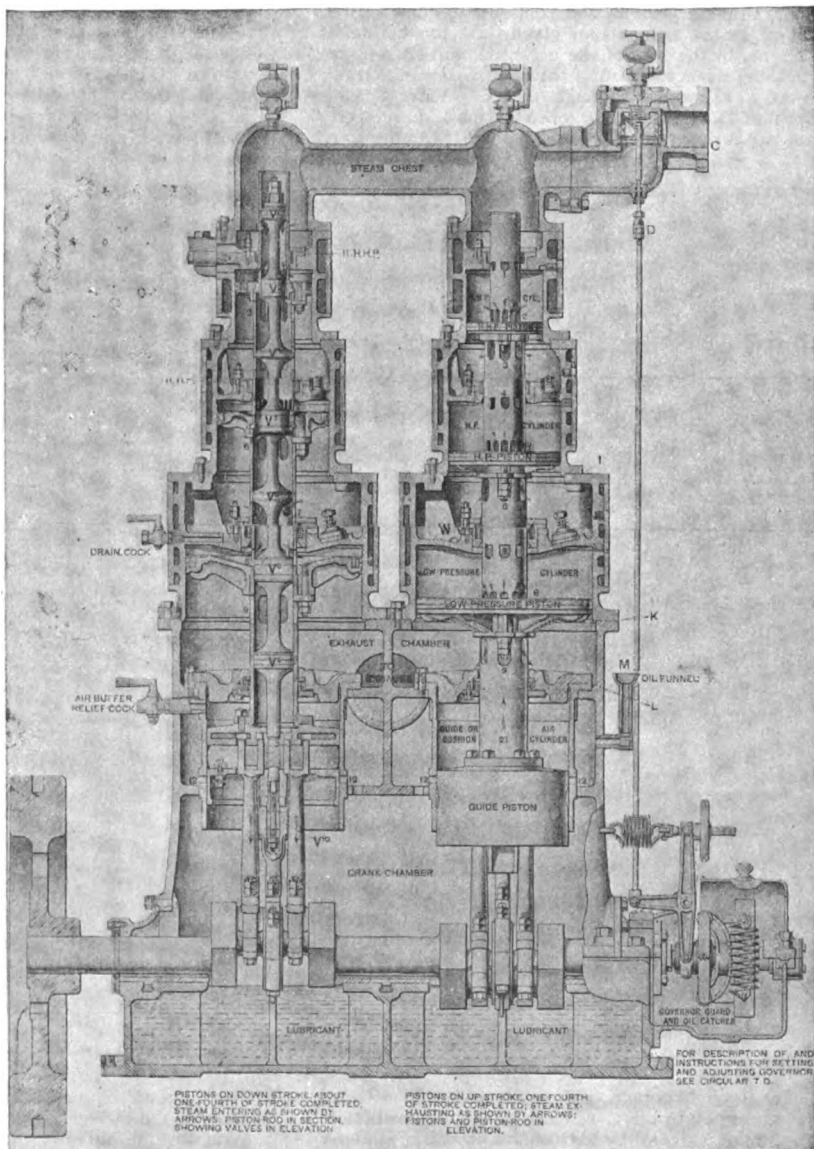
SECTION THROUGH A "WILLANS" CENTRAL VALVE TRIPLE EXPANSION STEAM ENGINE.
